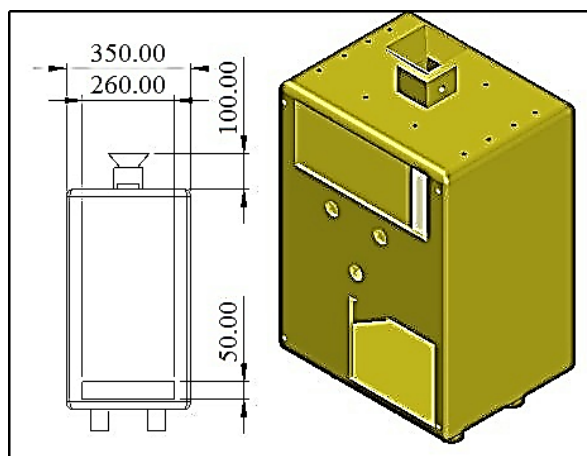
(b). Design & dimensions of the frame. (unit: mm)
